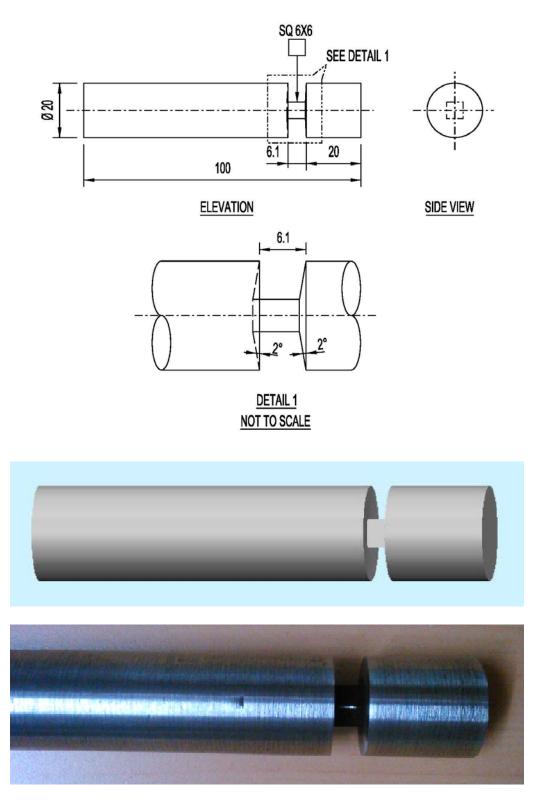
Fixed gap bobbin tool with square pin, concave-convex shoulder BT1
